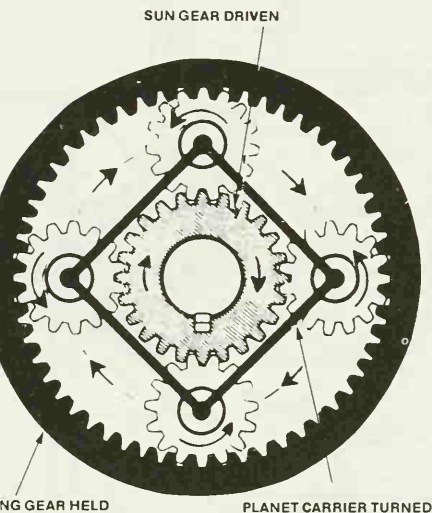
With the planet carrier as the input and the ring gear held, the sun is driven in overdrive. (Chevrolet Motor Division of General Motors Corporation)
